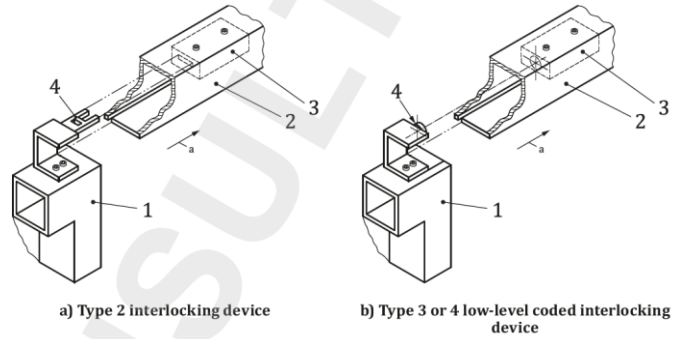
Example of protection against defeating of a torsion angle operated interlocking device by mounting out of reach at a machine for road construction
